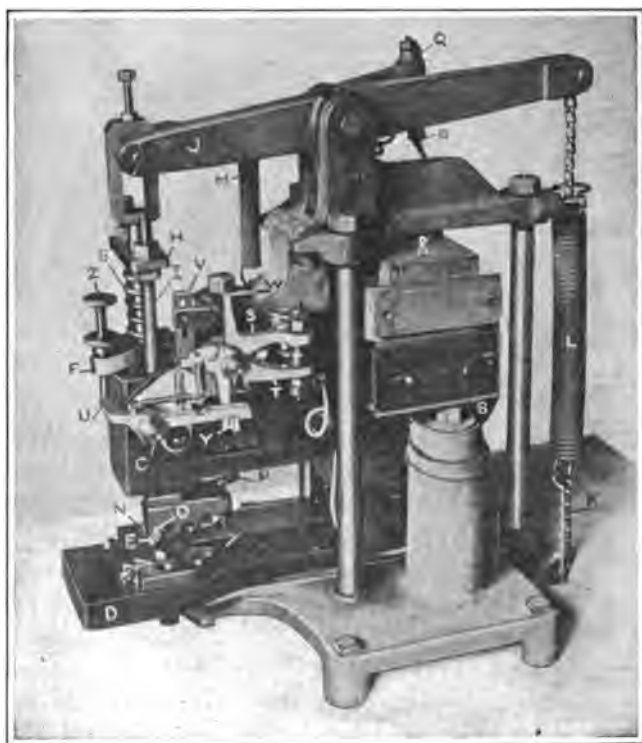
Special "Thomson" Electric Welding Machine built for Welding Platinum Tips to Screws, etc.
